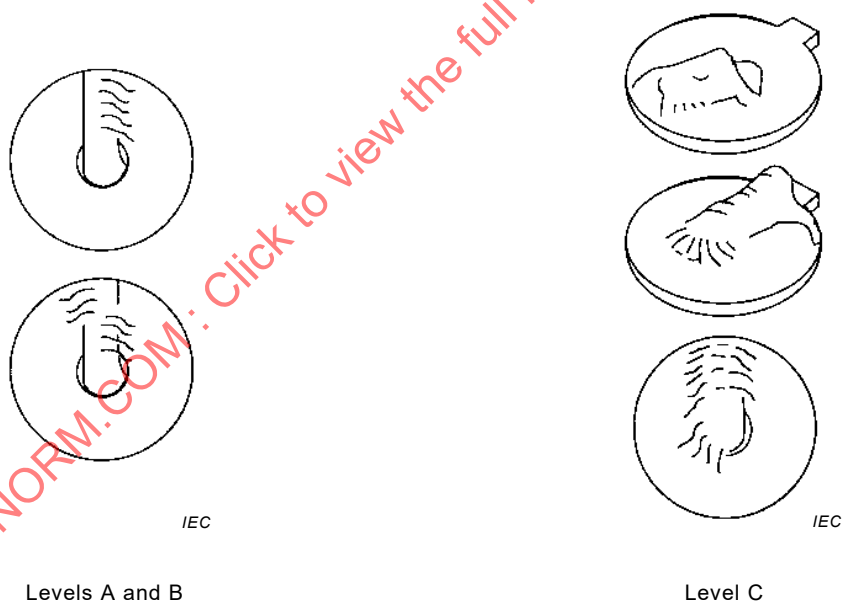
Lead-to-land fillet requirements for clinched leads and wires in non-plated through-holes
